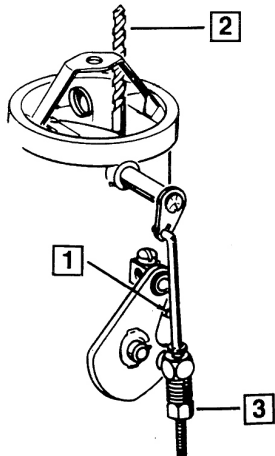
ACCELERATING PUMP LEVER ADJUSTMENT
